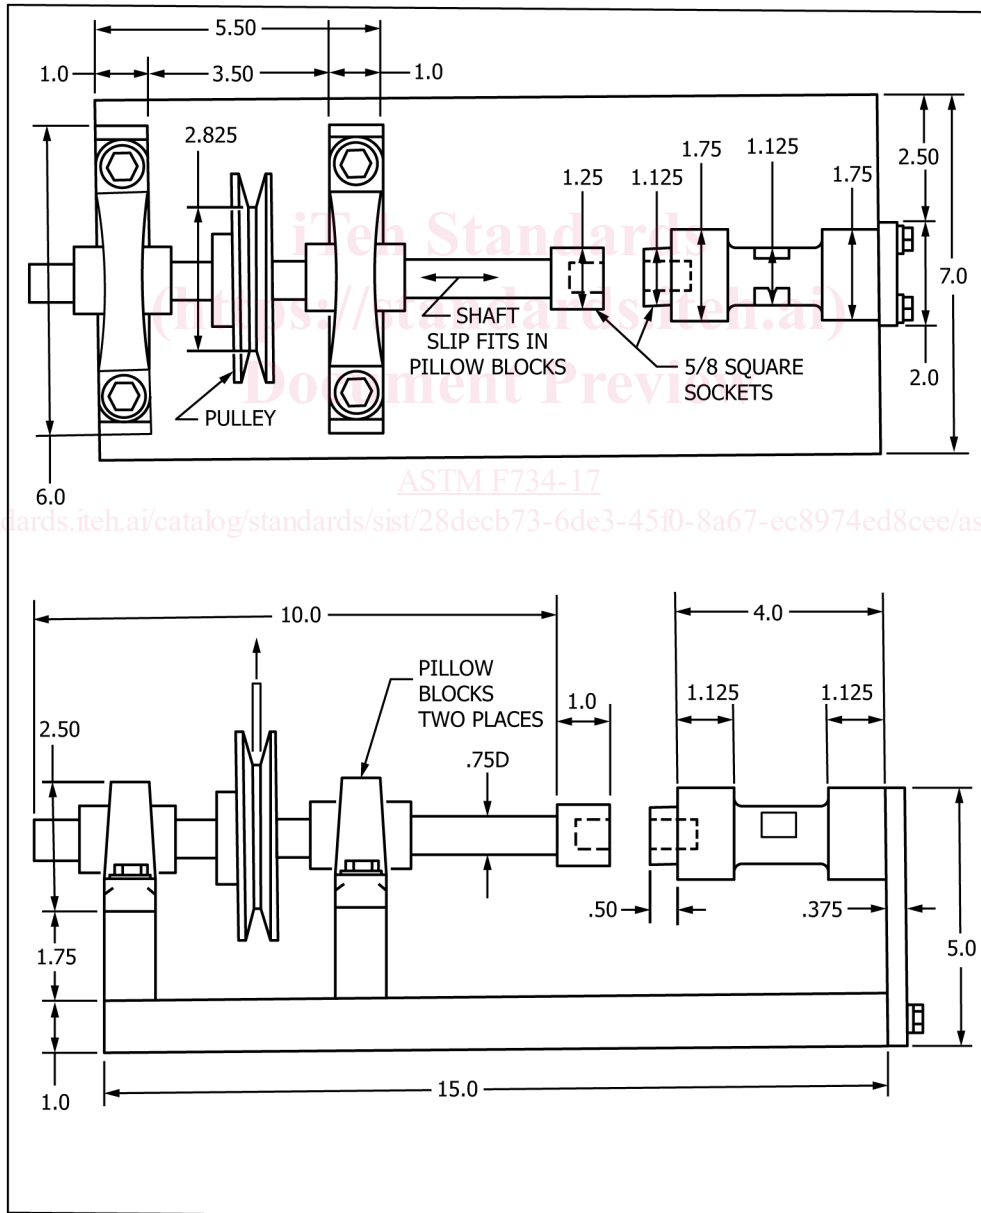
Torsional Shear Test Fixture (All Dimensions in Inches)
